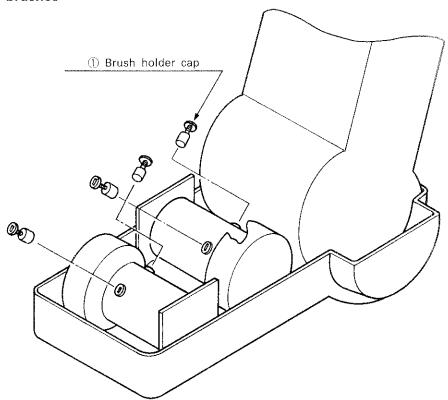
Checking and Replacing the Shoulder/Elbow Drive Motor Brushes
